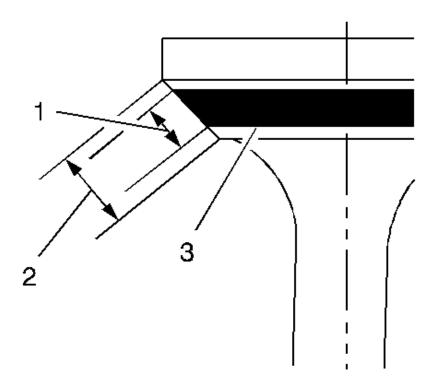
View Of Valve Contact Face Measurements Courtesy of GENERAL MOTORS COMPANY
